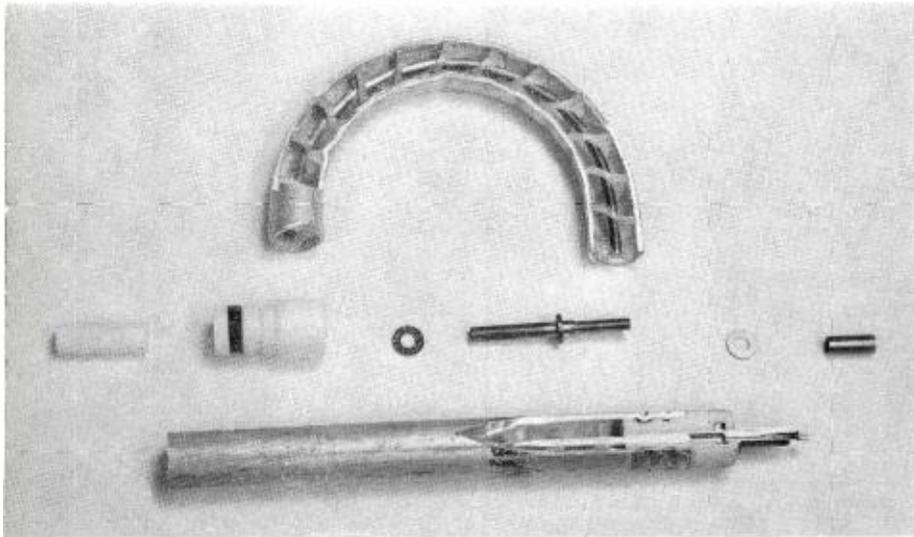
Exploded view of a section of Styroflex feedline with segments cut out to illustrate construction.
